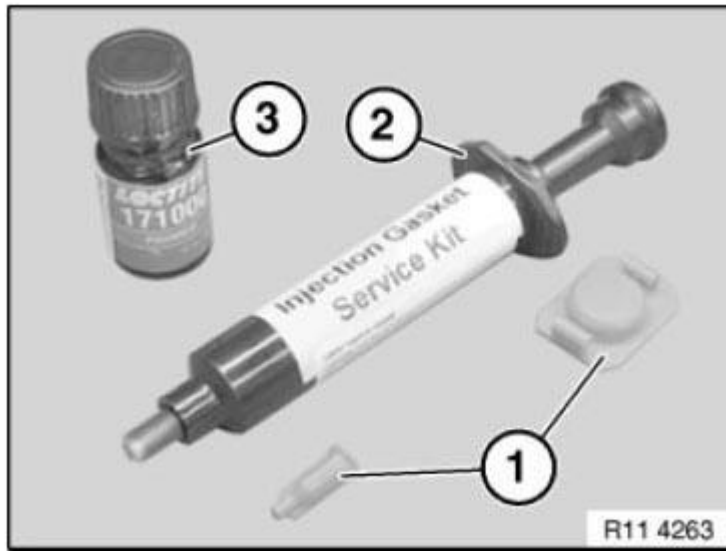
Identifying Liquid Sealing Compound, Injector Nozzles And Primer Bottle
